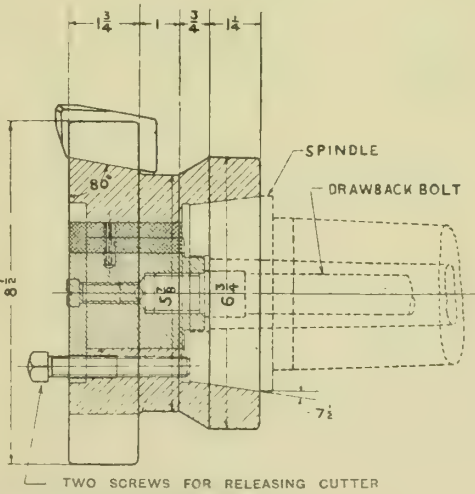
9IN. DIAMETER INSERTED TOOTH-FACE CUTTER.
